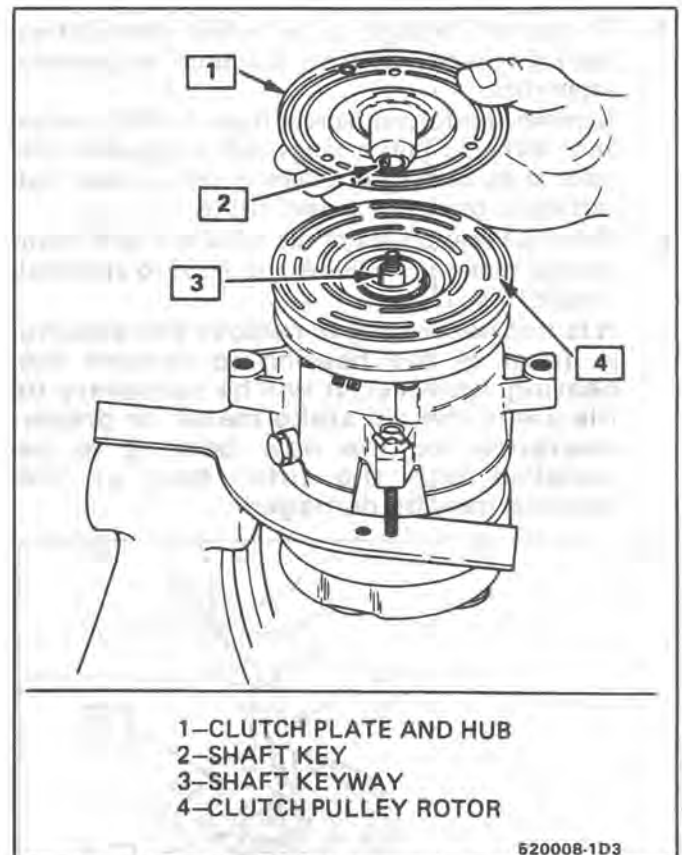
Shaft Key, Clutch Plate/Hub Installation
